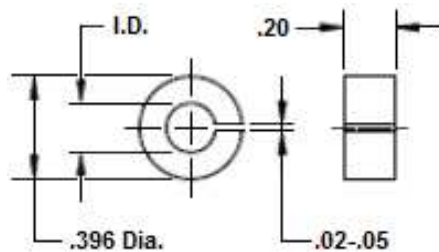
Coupling Adapter (Dimensions in inch [mm])
